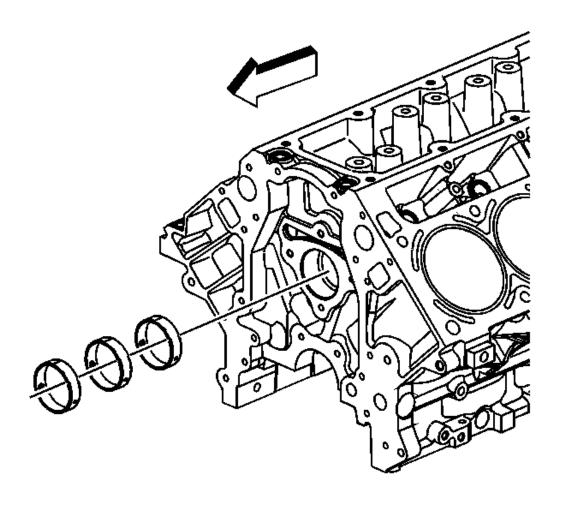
Camshaft Bearings Courtesy of GENERAL MOTORS CORP.
